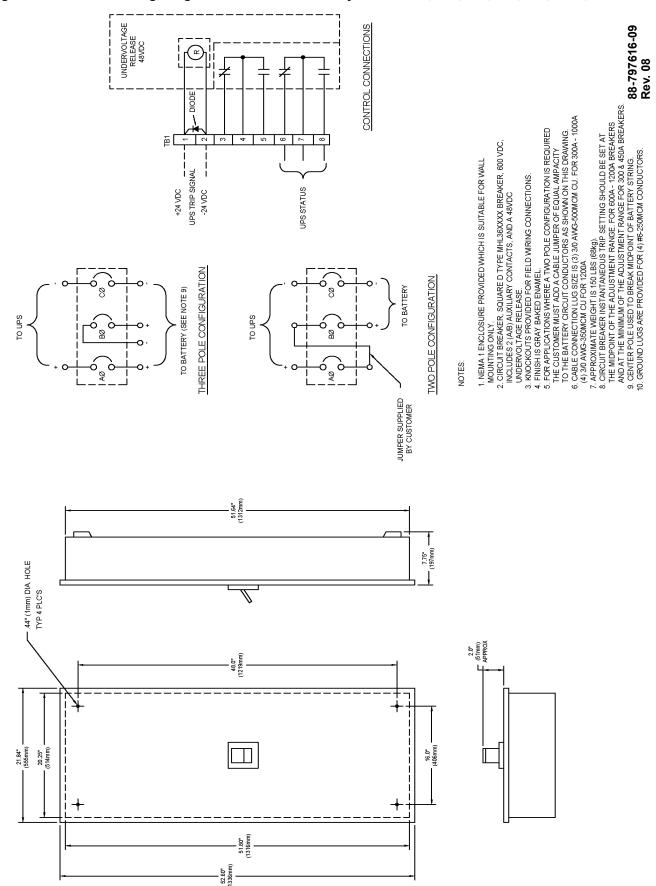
Outline drawing, dual-breaker module battery disconnect, 300 & 450A
